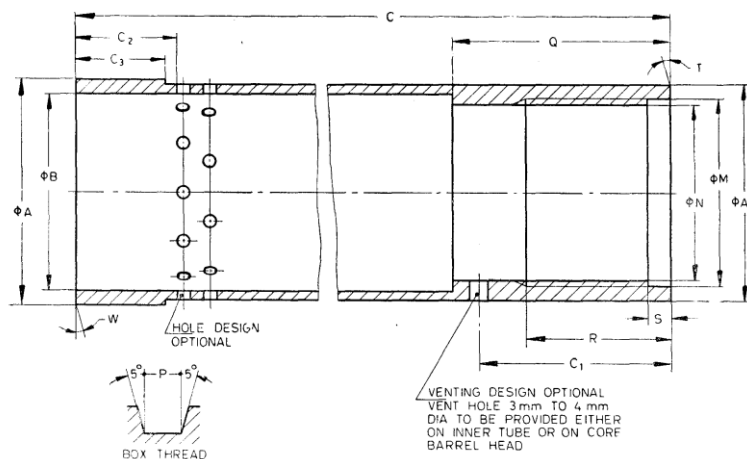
'WG' DESIGN DOUBLE TUBE CORE BARREL — OUTER TUBE
